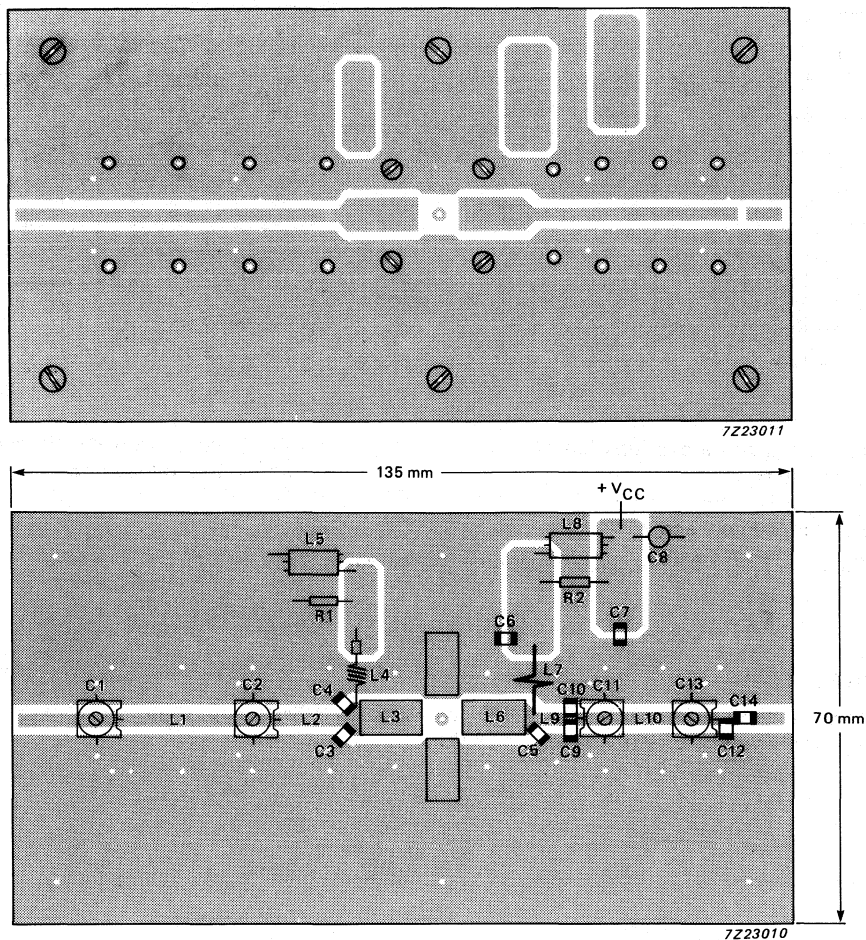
Printed circuit board and component layout for 900 MHz class-B test circuit.
